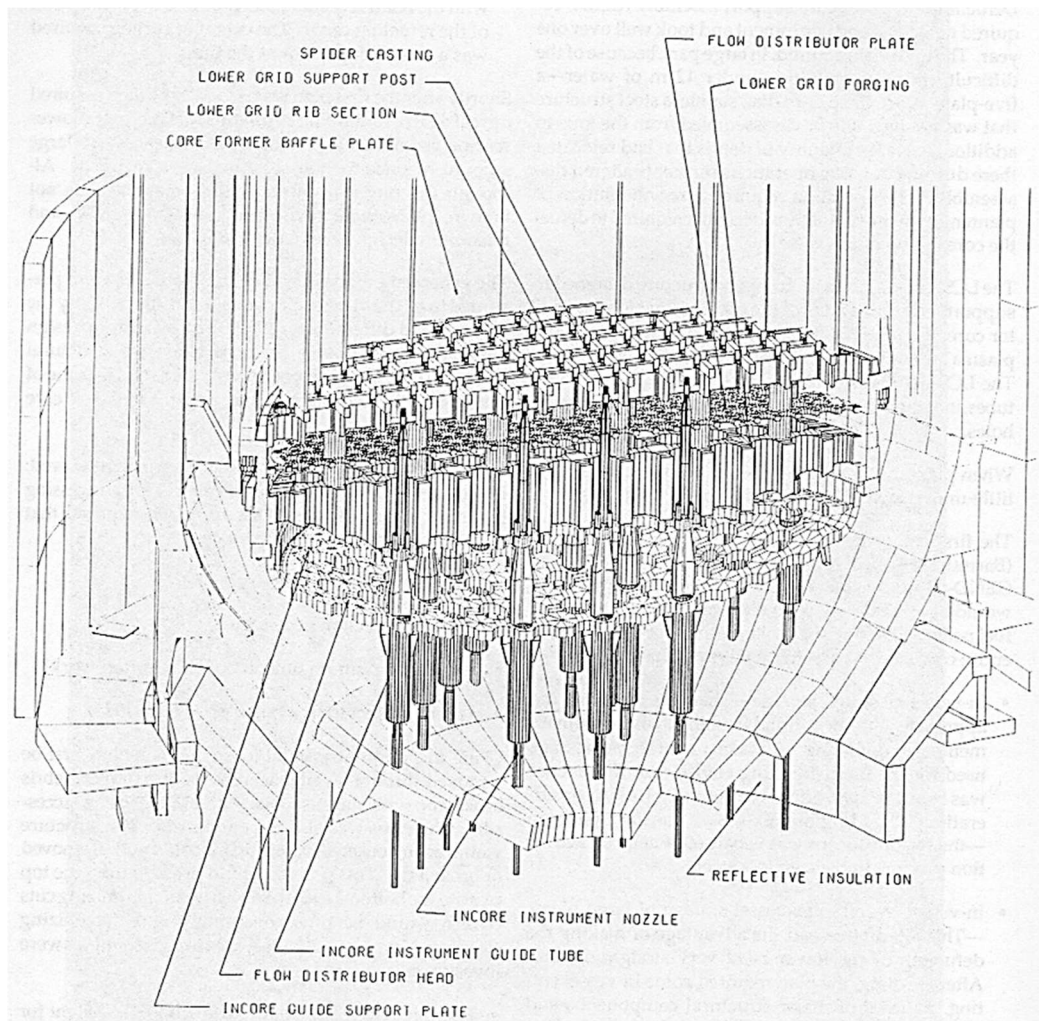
Lower core support assembly model (reproduced from Ref. [231] with permission courtesy of EPRI).
